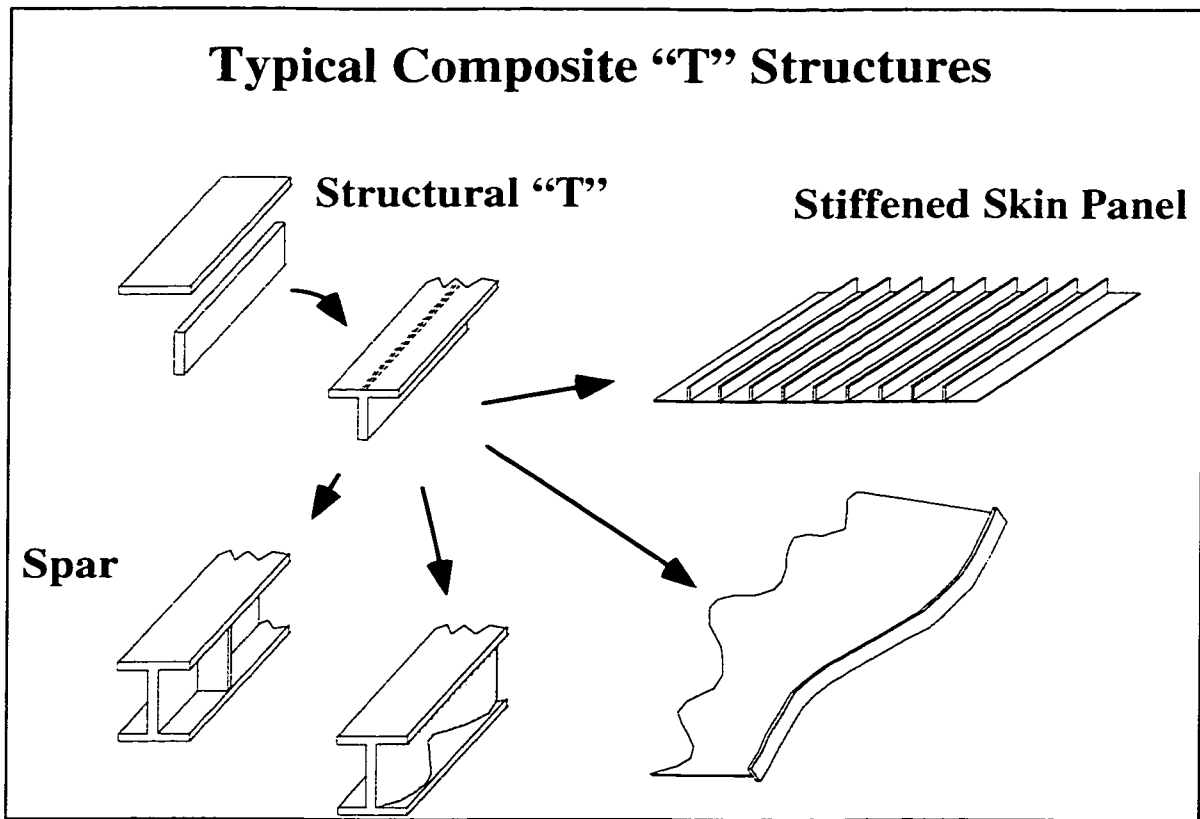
Structural T's Used in Aerospace Applications.
